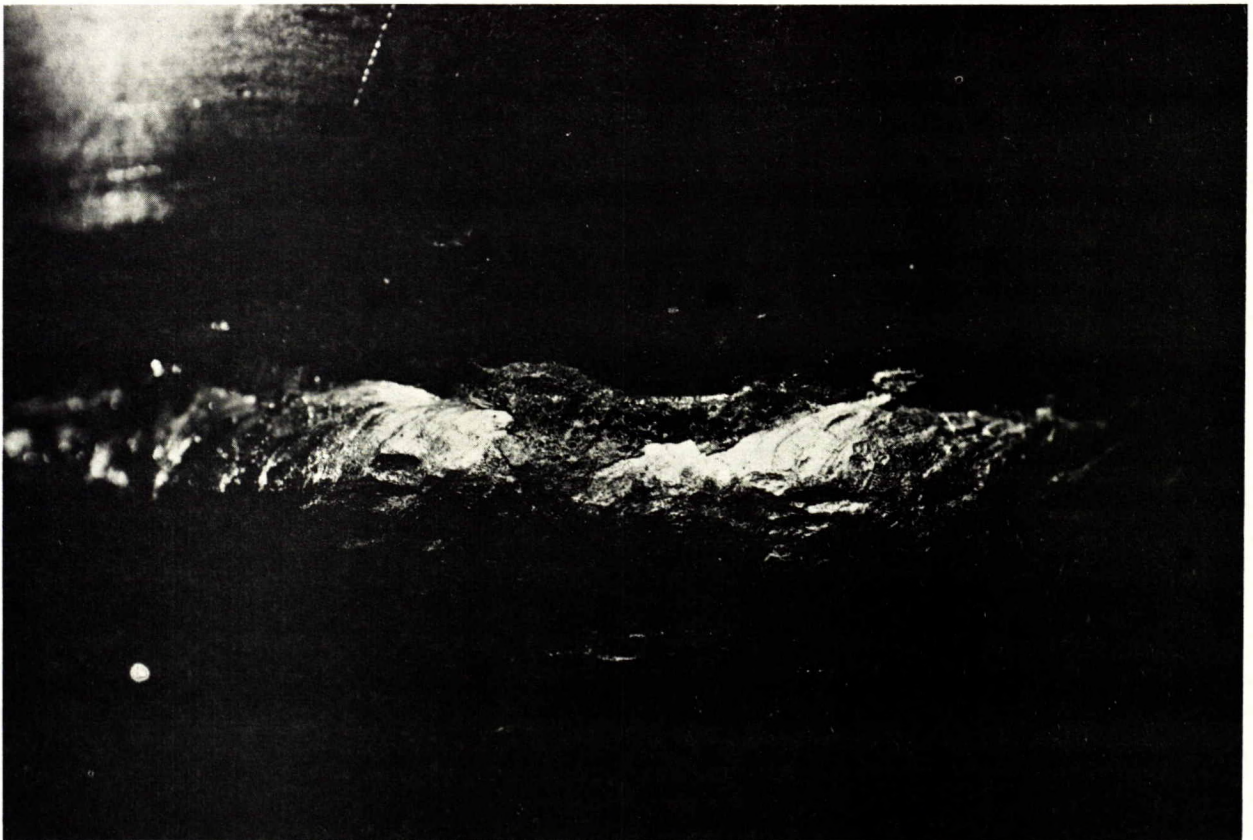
View of exterior weld showing porous structure of solidified flux (6X).
